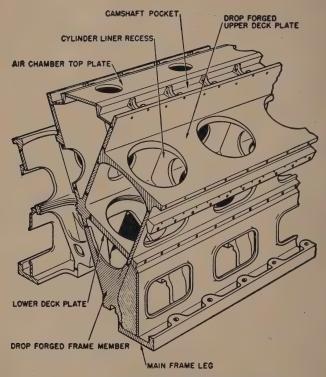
Sectional sketch of a GM welded frame.
